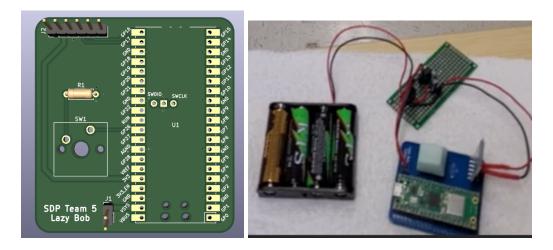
PCB for Caller. Left is the PCB render. Right is the built version. There is a protoboard connected to the PCB at the top of the right image due to the new Bluetooth module needing a different voltage as well as regulating the voltage for the microcontroller.
